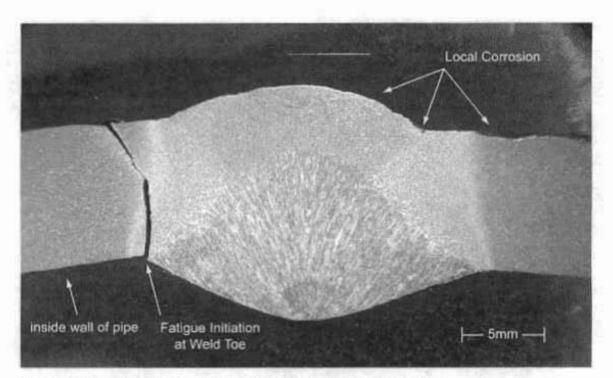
Fatigue initiating at toe of weld on interior surface of pipe.
